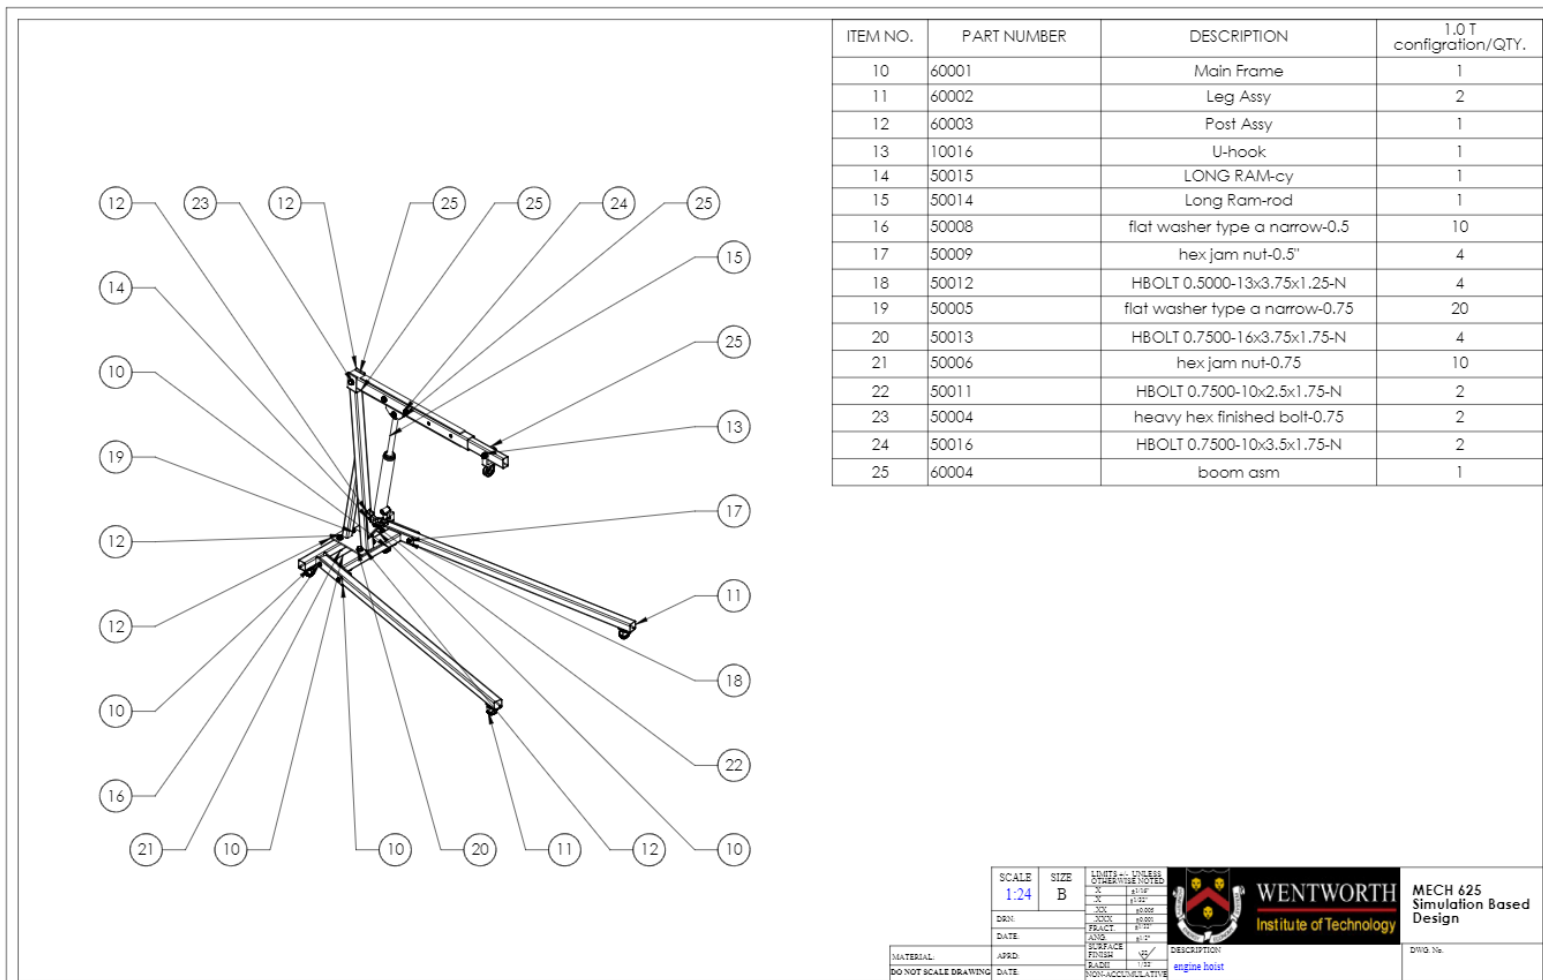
PN#60005 Full Assembly Redesign Drawing with BOM
